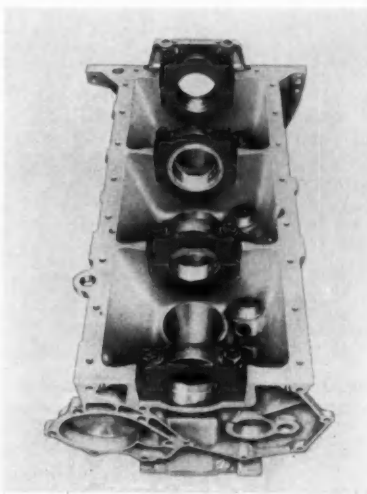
Chrysler die-cast aluminum cylinder block with bearing caps in place.
